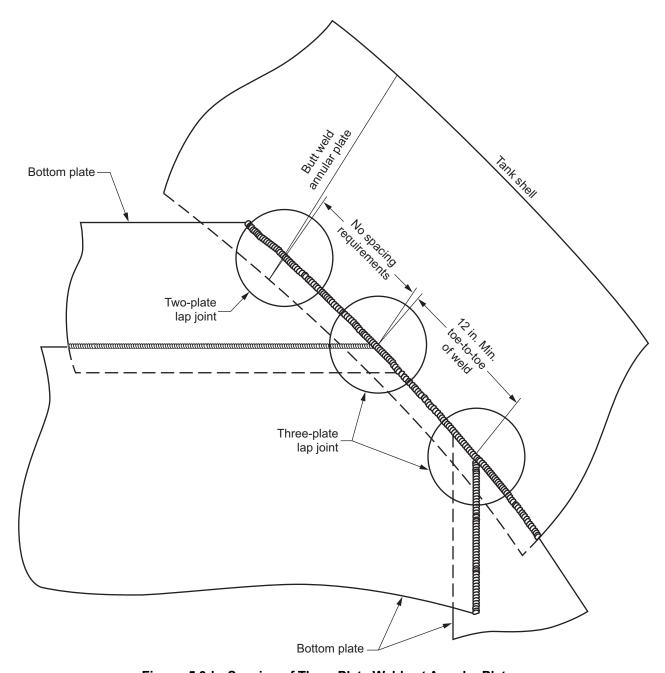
Spacing of Three-Plate Welds at Annular Plates
